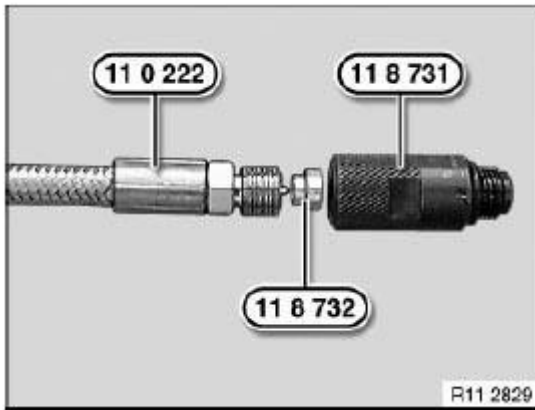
Identifying Special Tool 11 0 222, 11 8 732 And 11 8 731
